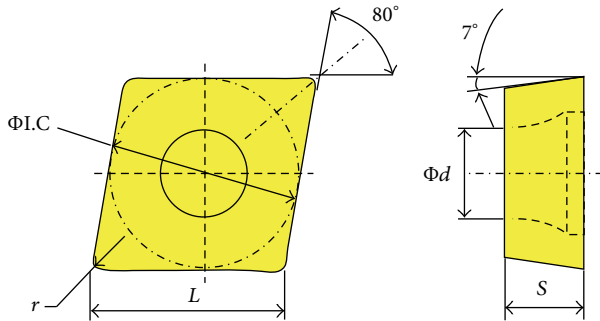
CCMT120404-HM YBM251 type cutting tool geometry.
